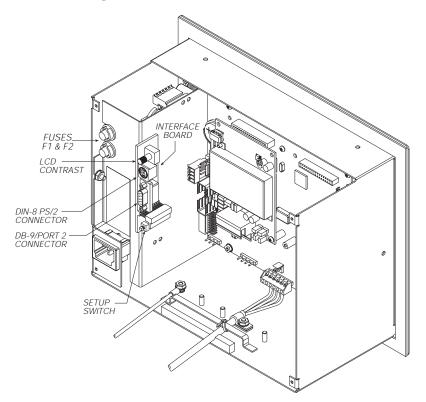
Panel Mount Enclosure, Interface Board and Fuse Locations
